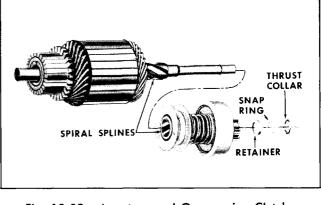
Armature and Overrunning Clutch Assembly—Exploded
